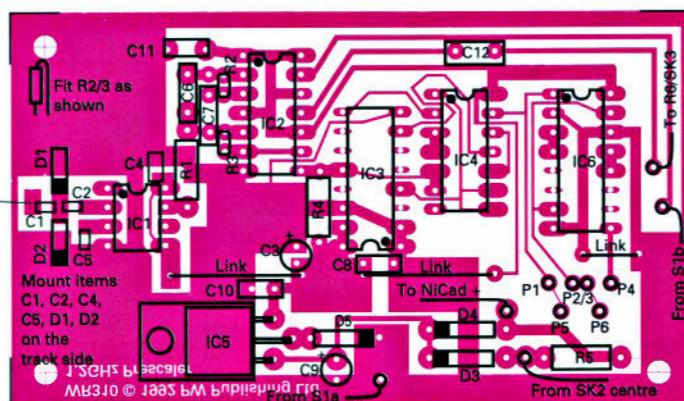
Component side of the p.c.b., with component overlay provided to assist placing. The components marked as such, must be mounted on the copper track side of the p.c.b.
